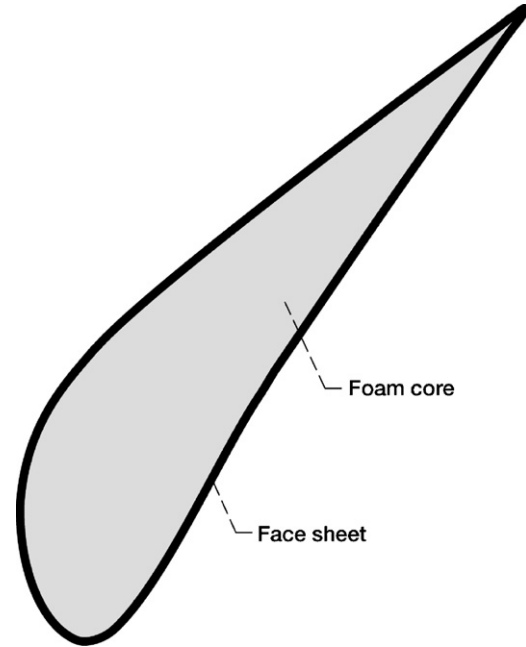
Schematic of the cross-section sandwiched foam fan blade showing the foam core enclosed by the face sheet skin.
